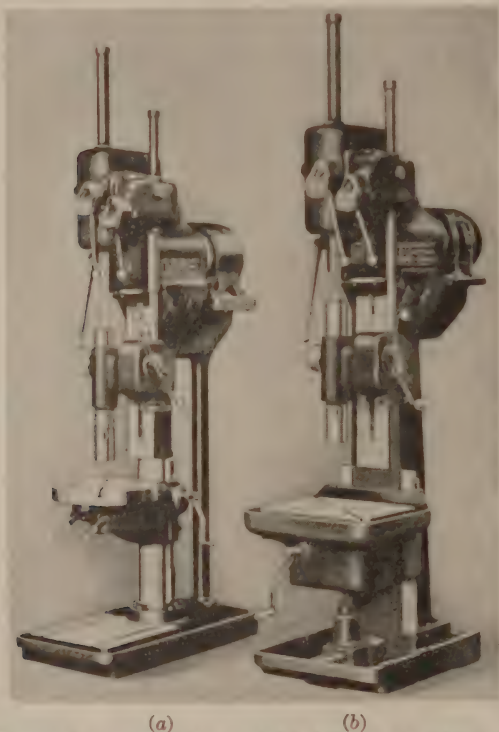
All-g geared super-service upright drilling machines: (a) round column; (b) box column. (Courtesy of The Cincinnati-Bickford Tool Company.)
